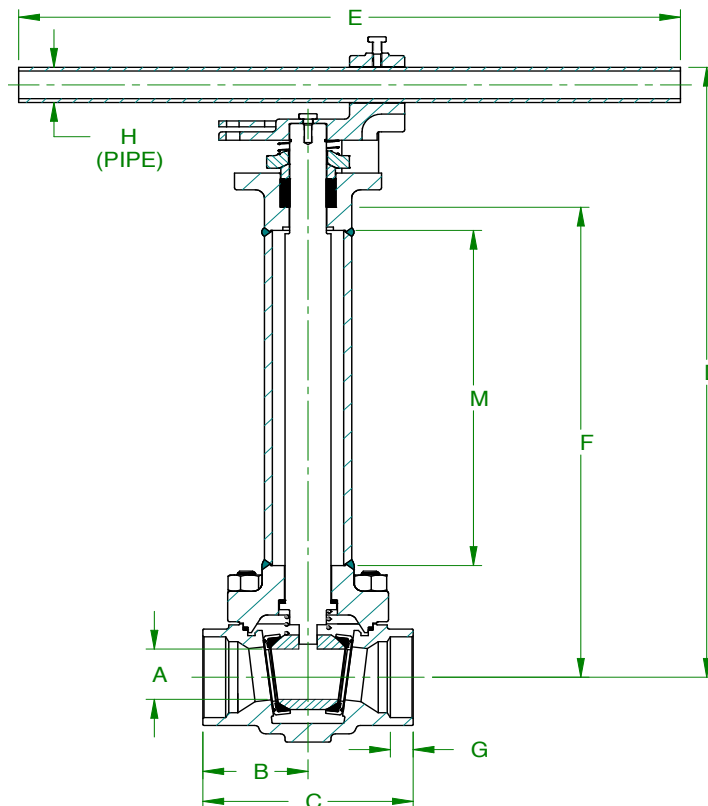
/600, STANDARD/FULL PORT, SOCKET WELD
